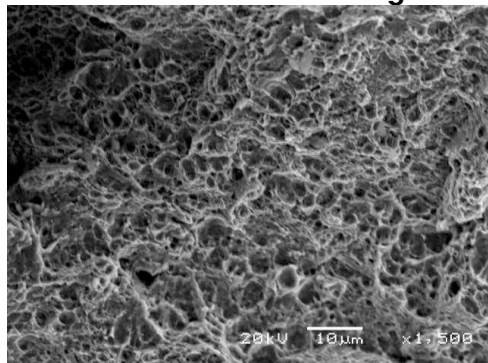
Fracture surface geometry showing typical ductile features; remaining bolts (x1500, SEM)
